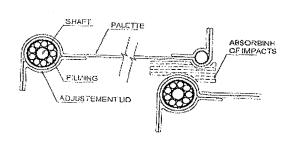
PLATE WITH SPINDLE BEARING FIXED TO THE VANE
